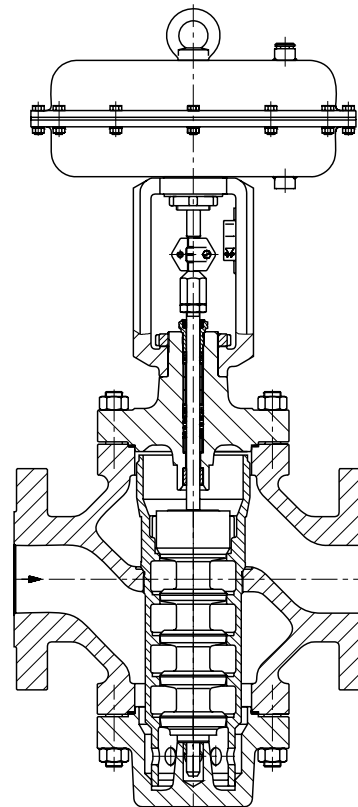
· Type 3255-1 Pneumatic Control Valve with a five-stage axial plug
